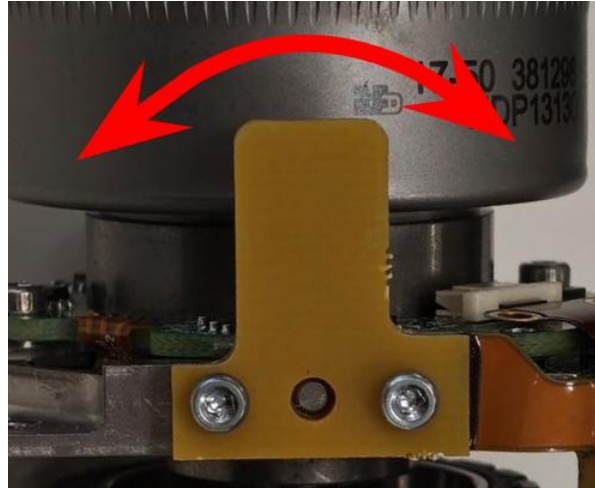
Clearance-fit mounting holes on the encoder PCB allows for angular play, affecting mounting precision.
